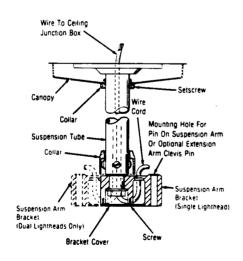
DUAL CEILING MOUNTED FIXTURE WIRING.
